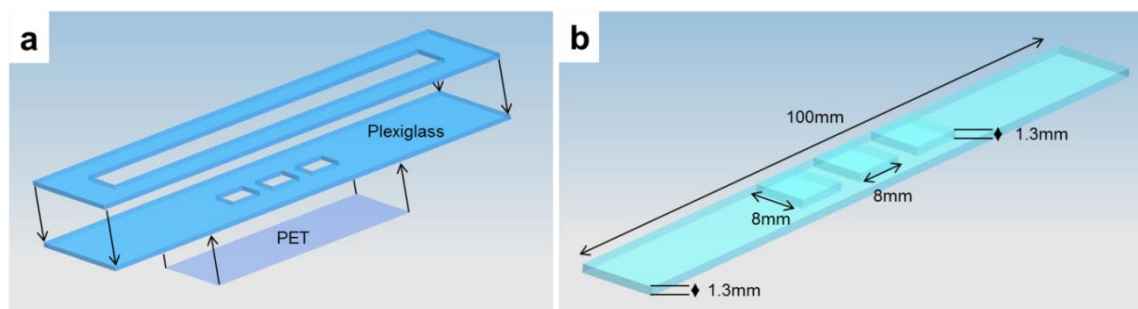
(a) Laser-cut plexiglass mold for stamp roll fabrication, (b) stamp dimensions.
